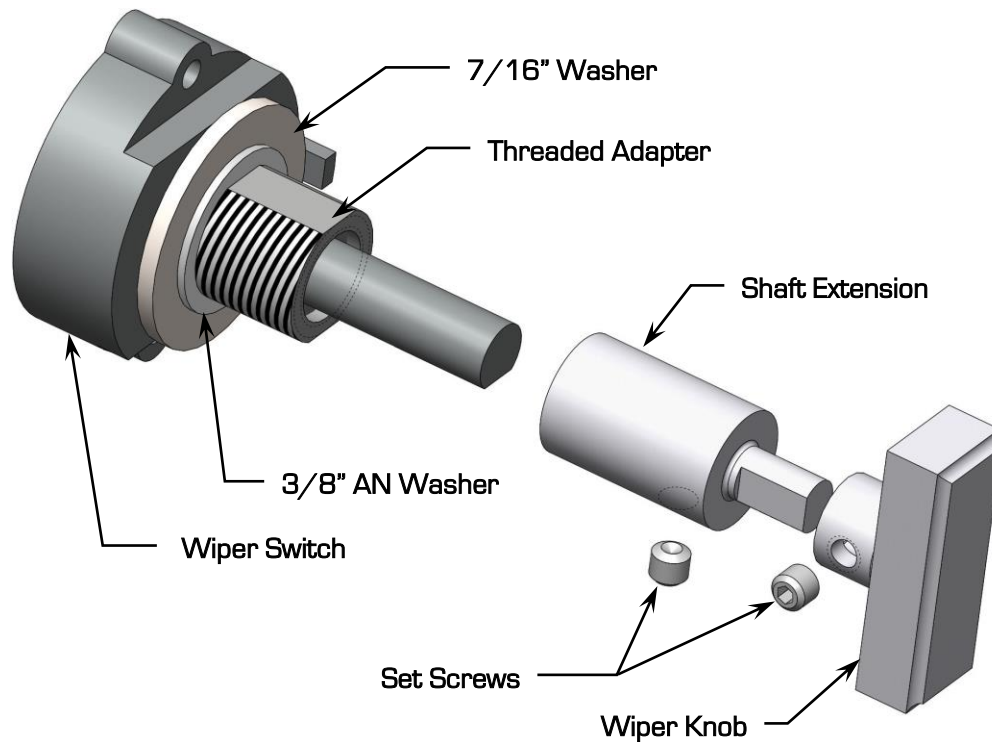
1968 Chevelle Wiper Switch Assembly
